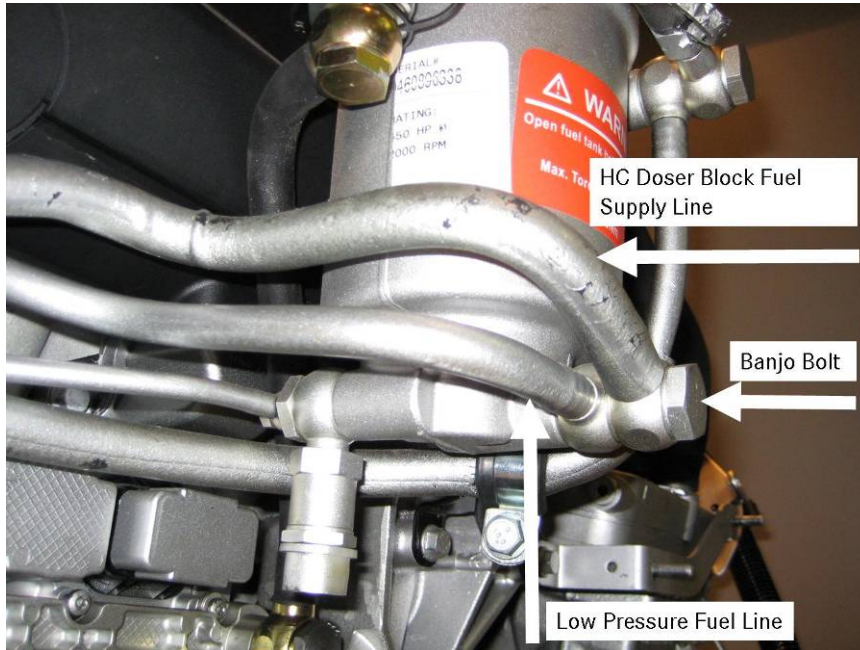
Fuel Filter Housing Banjo Bolt Removal (EPA07 Configuration)
